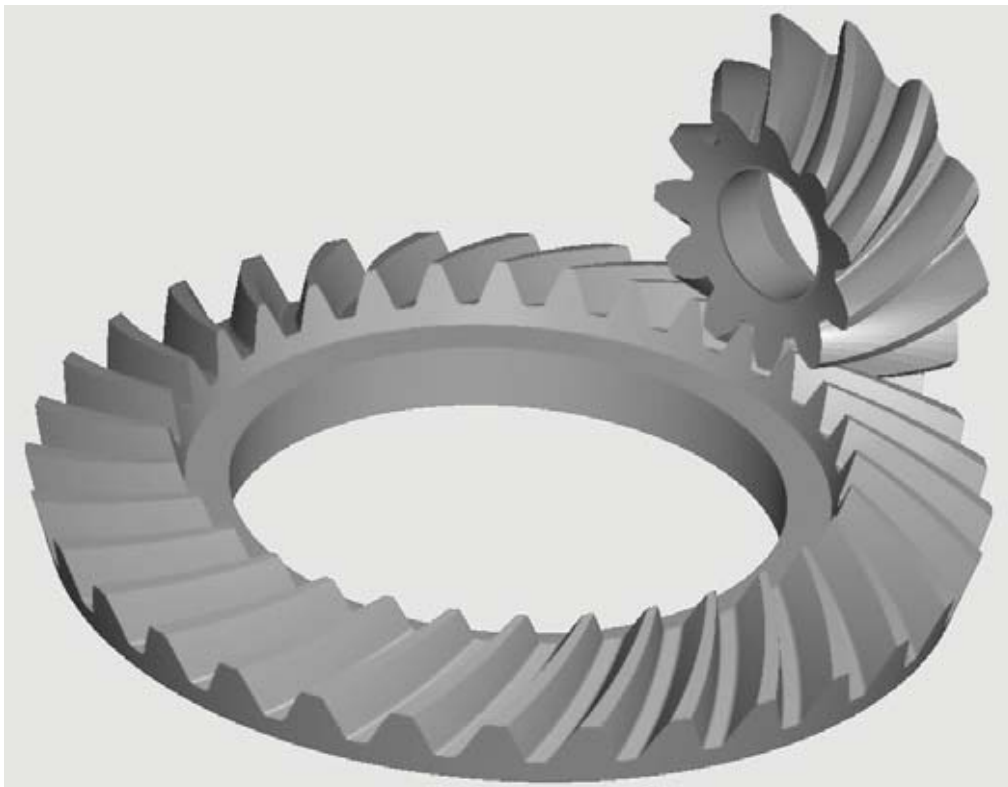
CAD model of Gleason SGM bevel gears with circular-arc flank line
